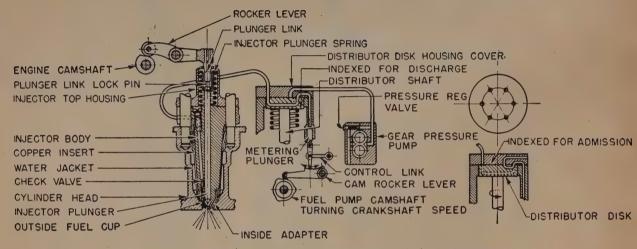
Cummins distributor-type low-pressure fuel injection system.
